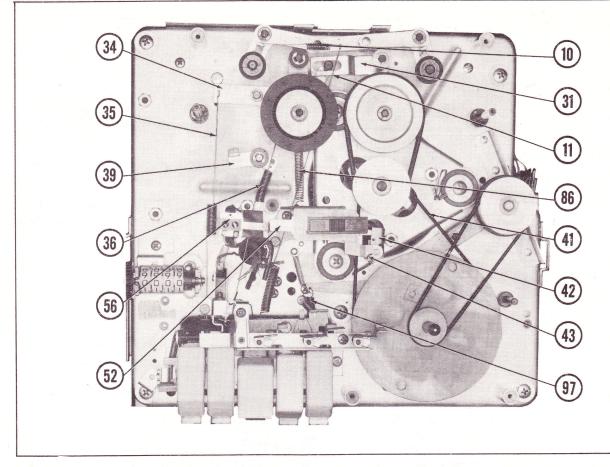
Top View Of Mechanism With Reel Rests And Head Plate Assembly Removed.
